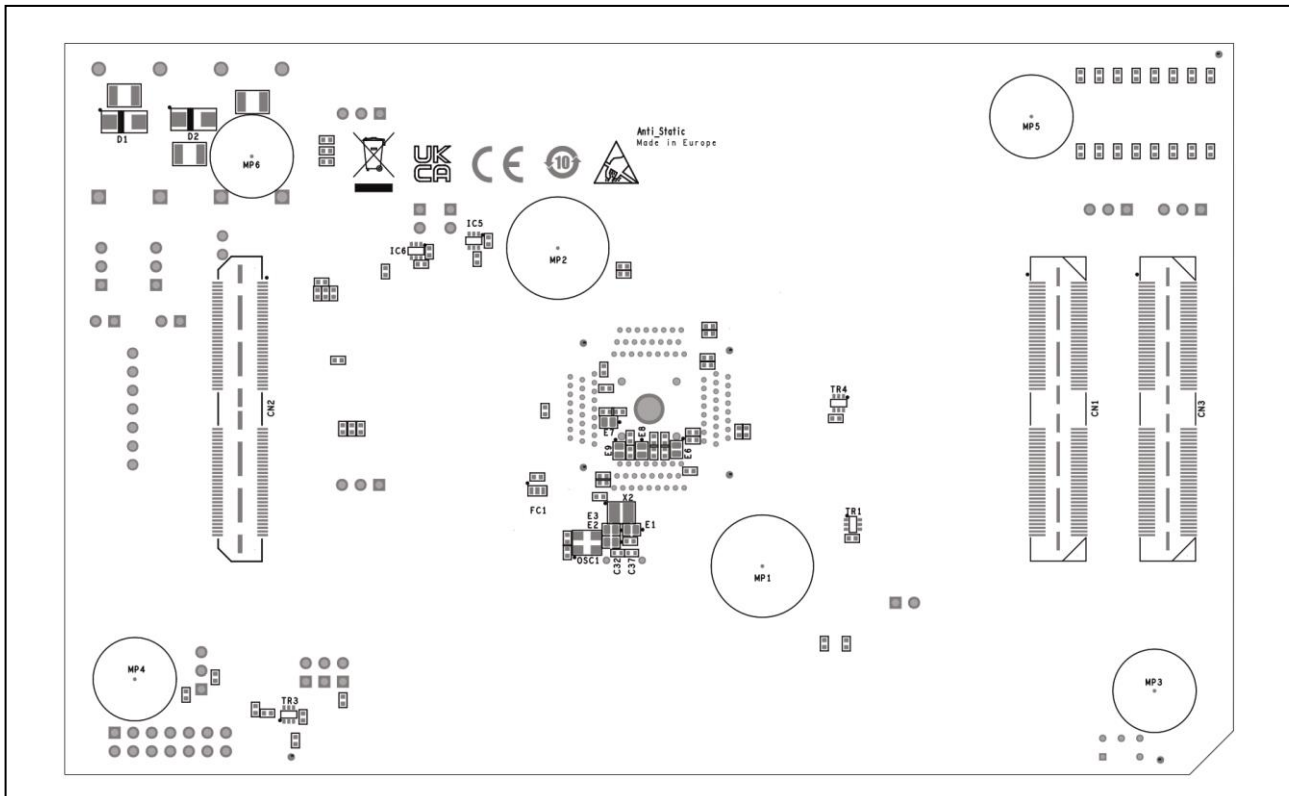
Piggyback board bottom view of board version D020647_06_V01
